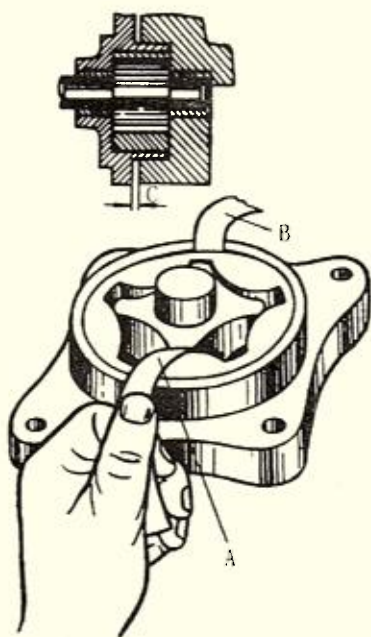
Checking the clearances of the pump with feeler gauge
